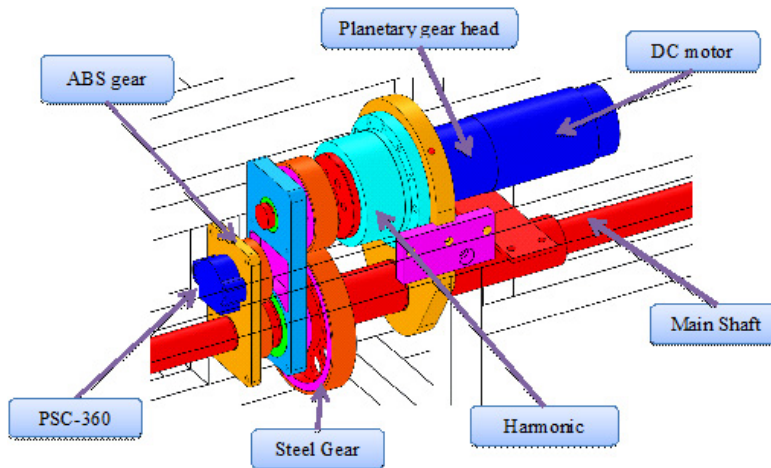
Position control DC motor –gear head and harmonic drive to rotate the main shaft
